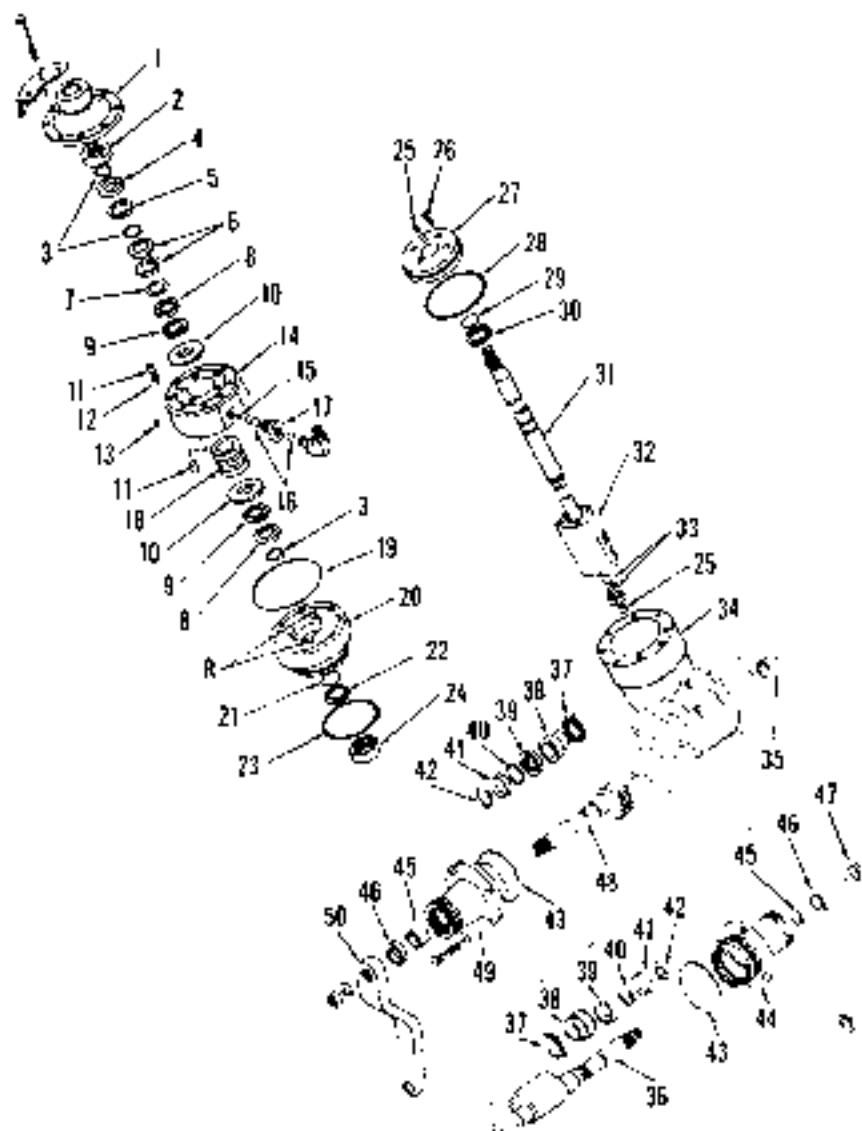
Exploded view of power steering gear available on all MF230 models, all MF235 models except Orchard and MF245 Vineyard models.
